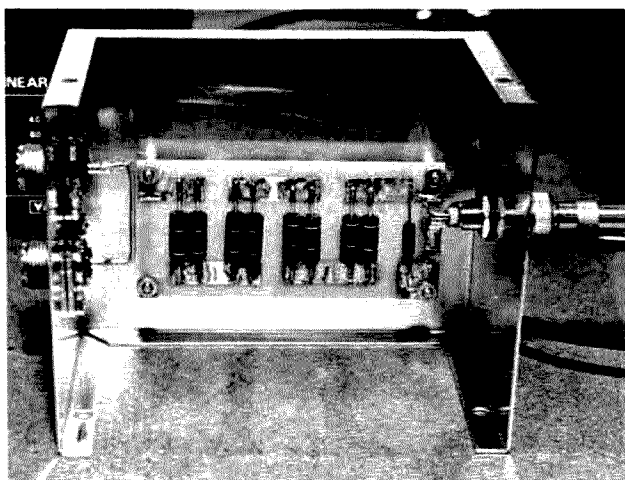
Photo C. Construction detail of the L-pad sampler. Although simple, build the L-pad carefully since it handles high power.
